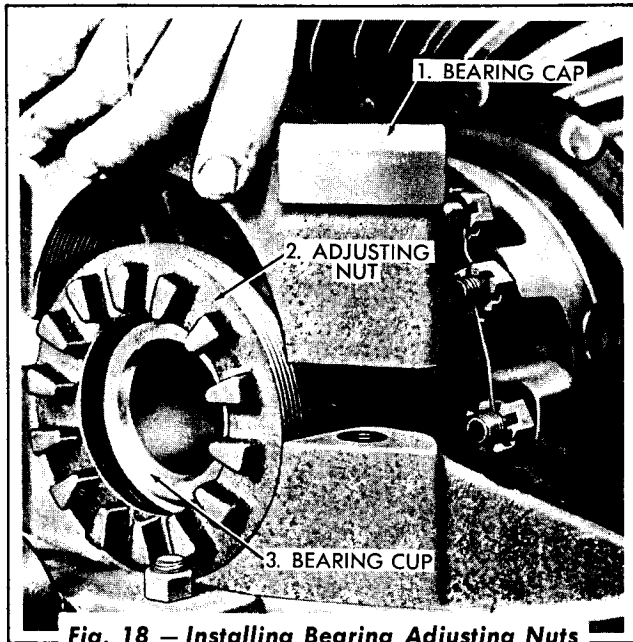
Installing Bearing Adjusting Nuts and Bearing Caps
